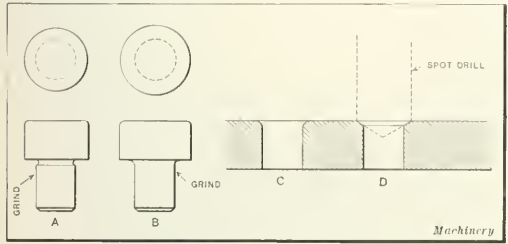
Method of finishing Jig Feet and Holes to avoid Development of Crack while hardening
